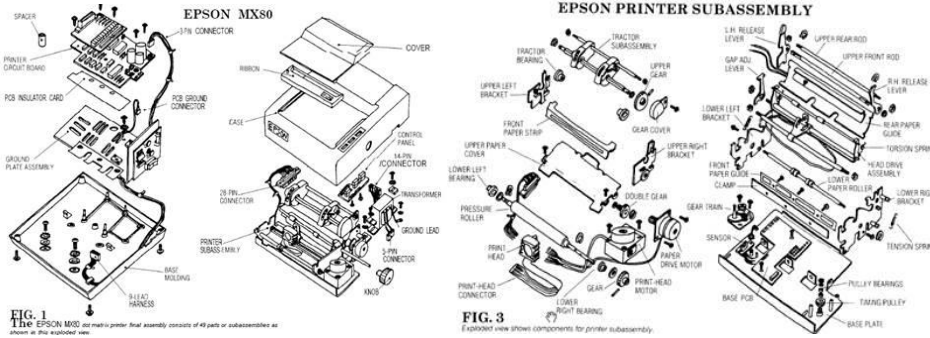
The EPSON MX80 dot matrix printer final assembly consists of 49 parts or subassemblies as shown in the exploded view.
